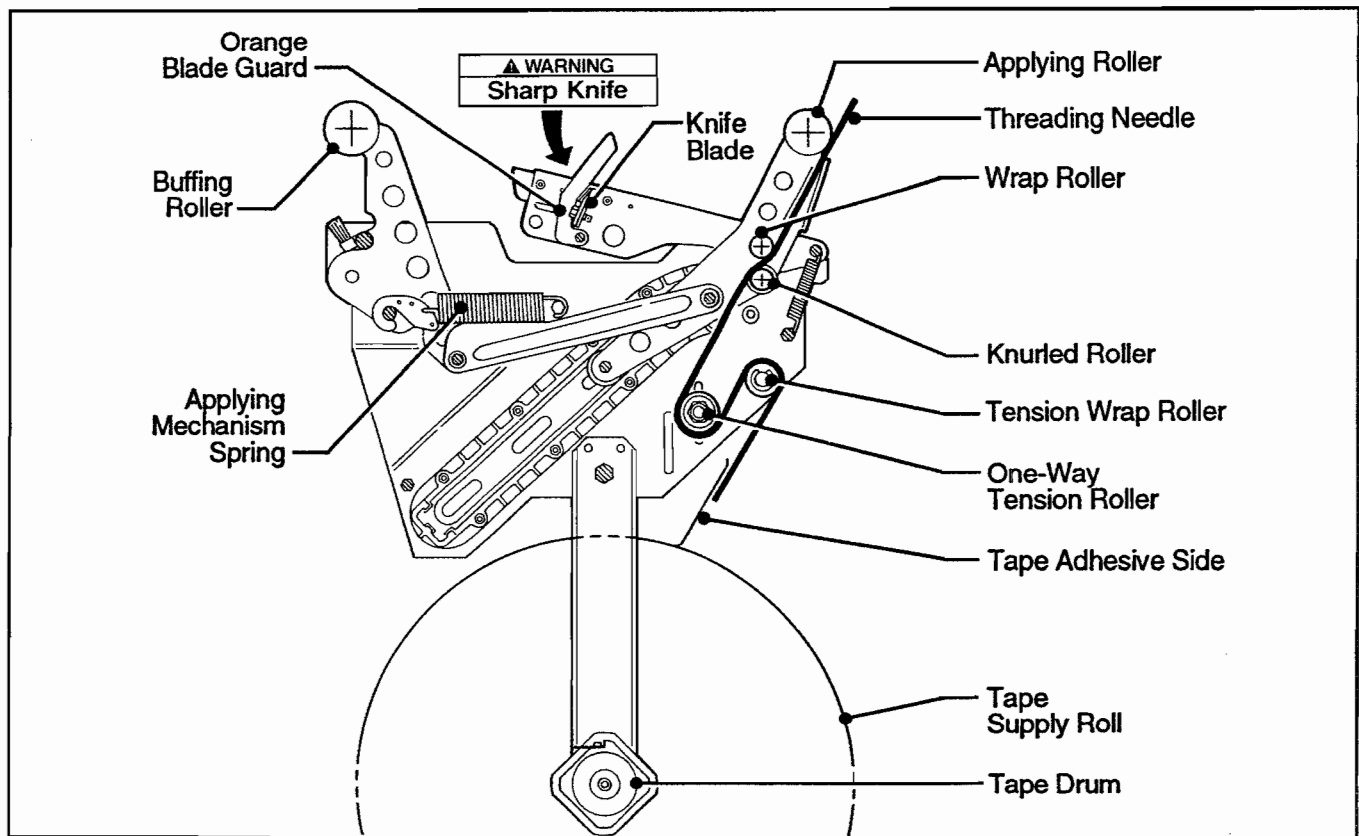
Taping Head Components/Threading Diagram, Lower Head
